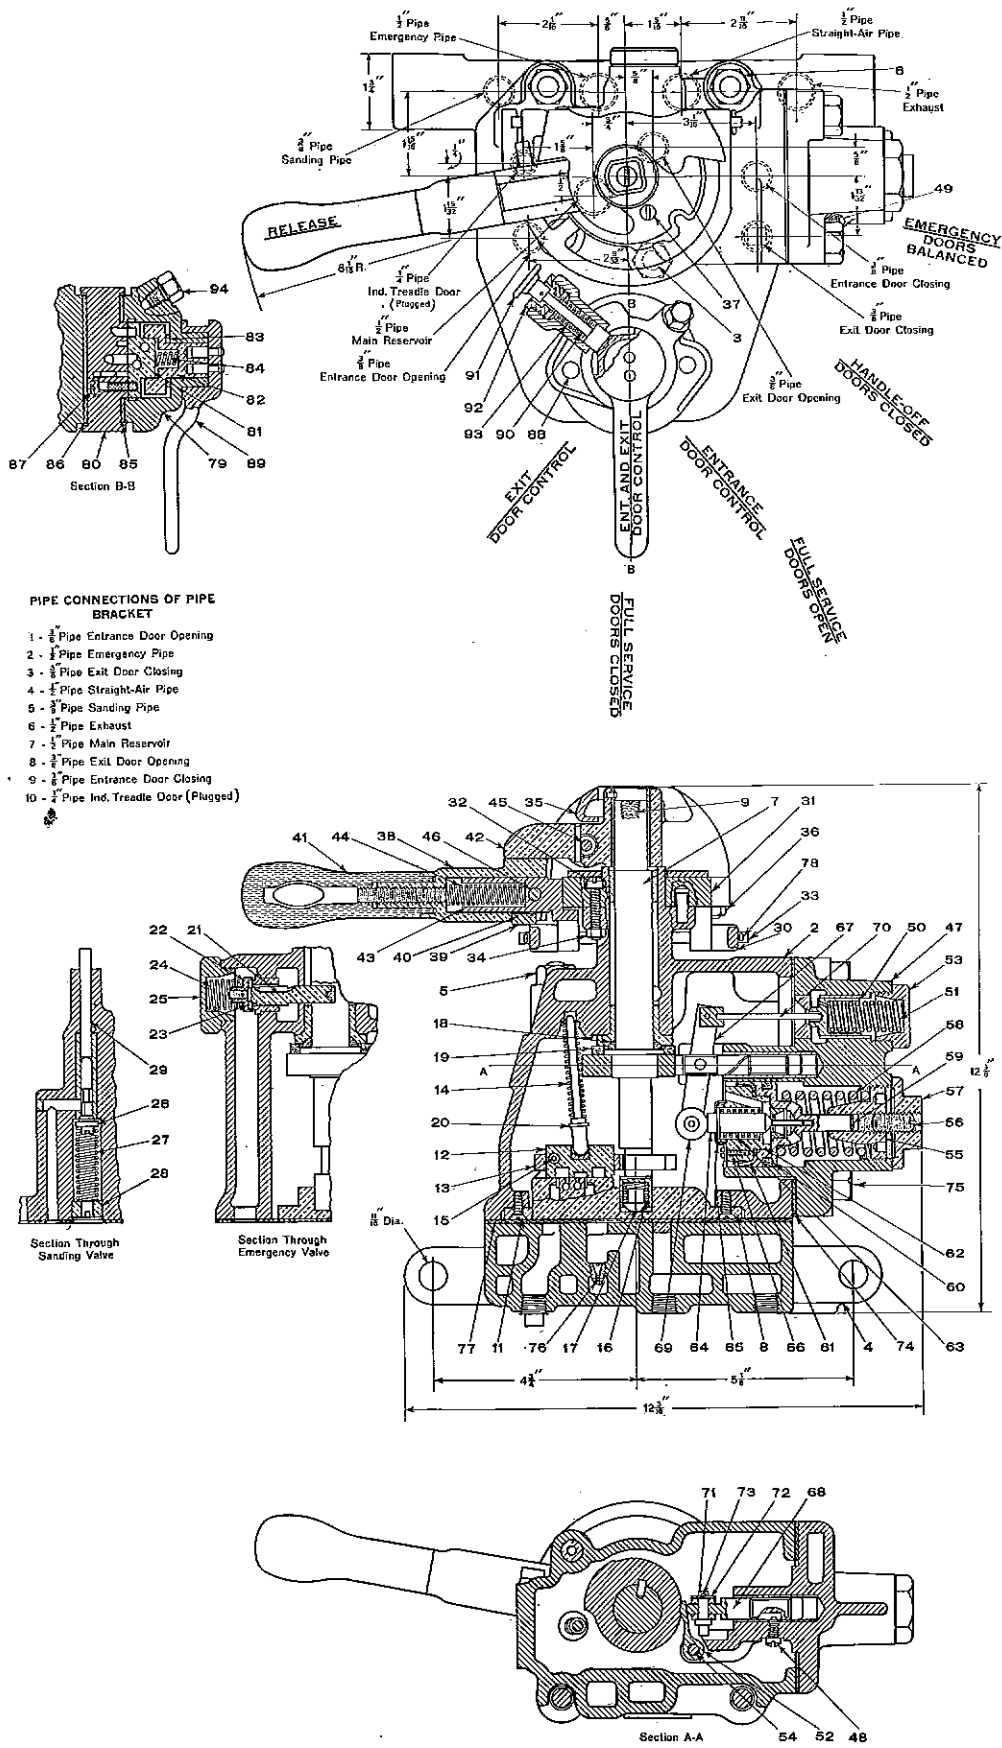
MD-35 Self-Lapping Brake Valve, Assembly
